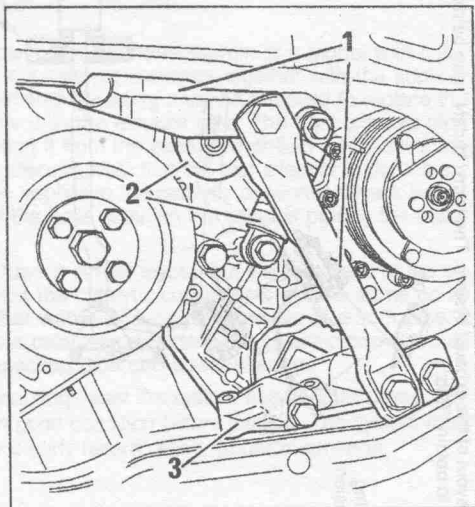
Remove the parts at the front of the engine to gain access to the oil pump.
